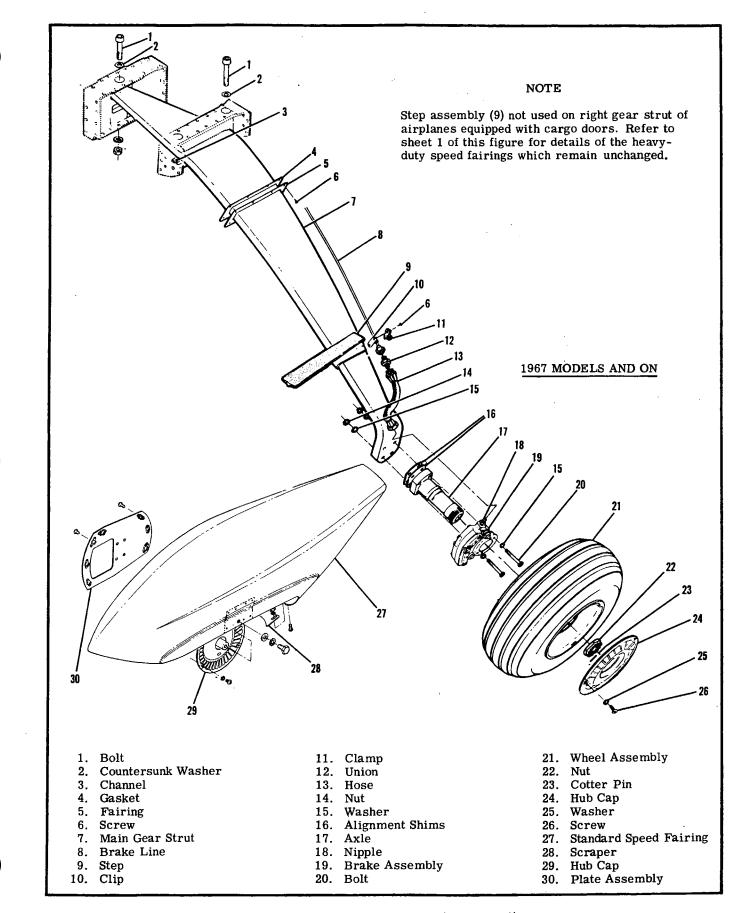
Main Landing Gear (Sheet 2 of 2)
